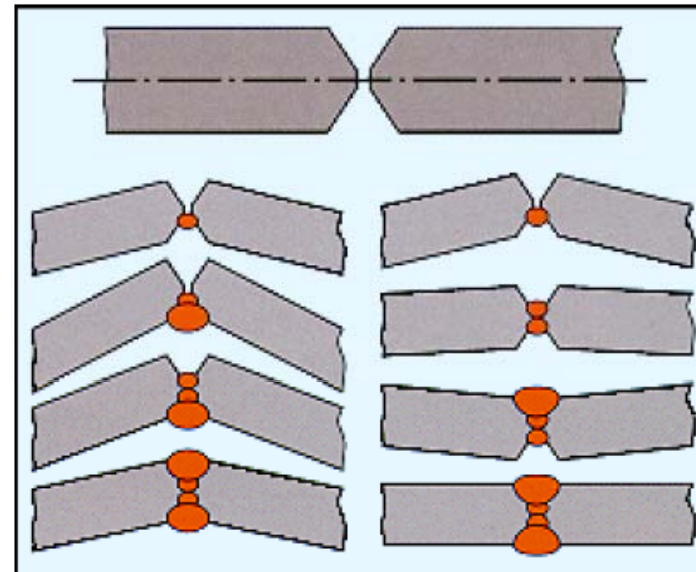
Balanced welding to reduce the amount of angular distortion
